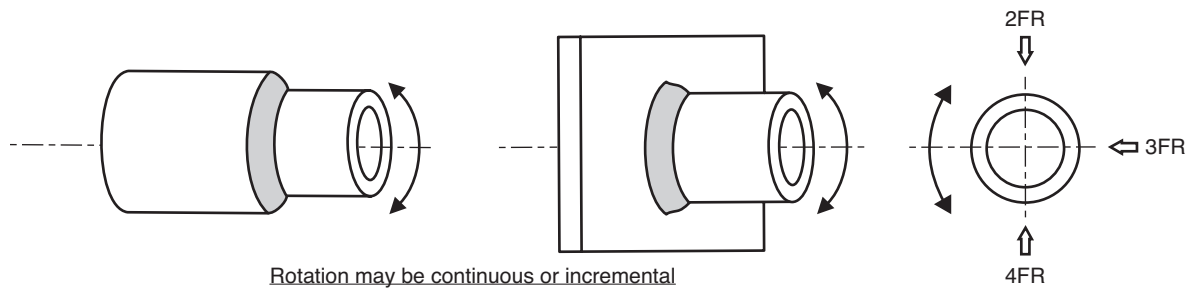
(Continued)—Welding Test Positions and Their Designations for Groove Welds and Surfacing Welds in Pipe
